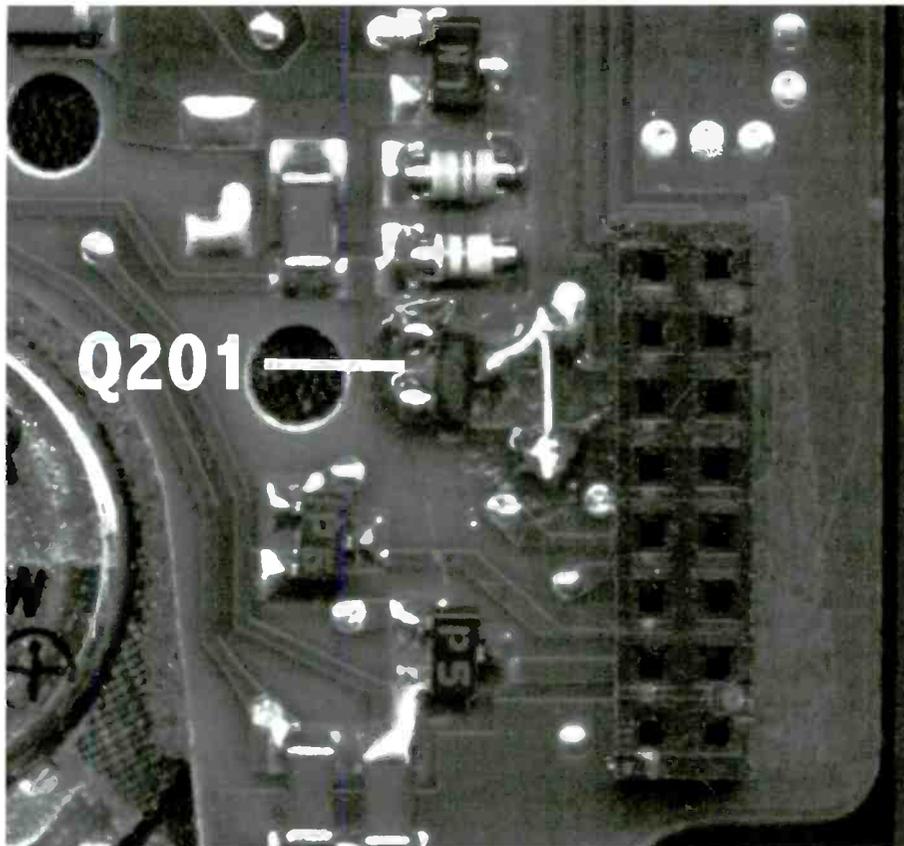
Transistor Q201 location on BC200XLT Micom board.
